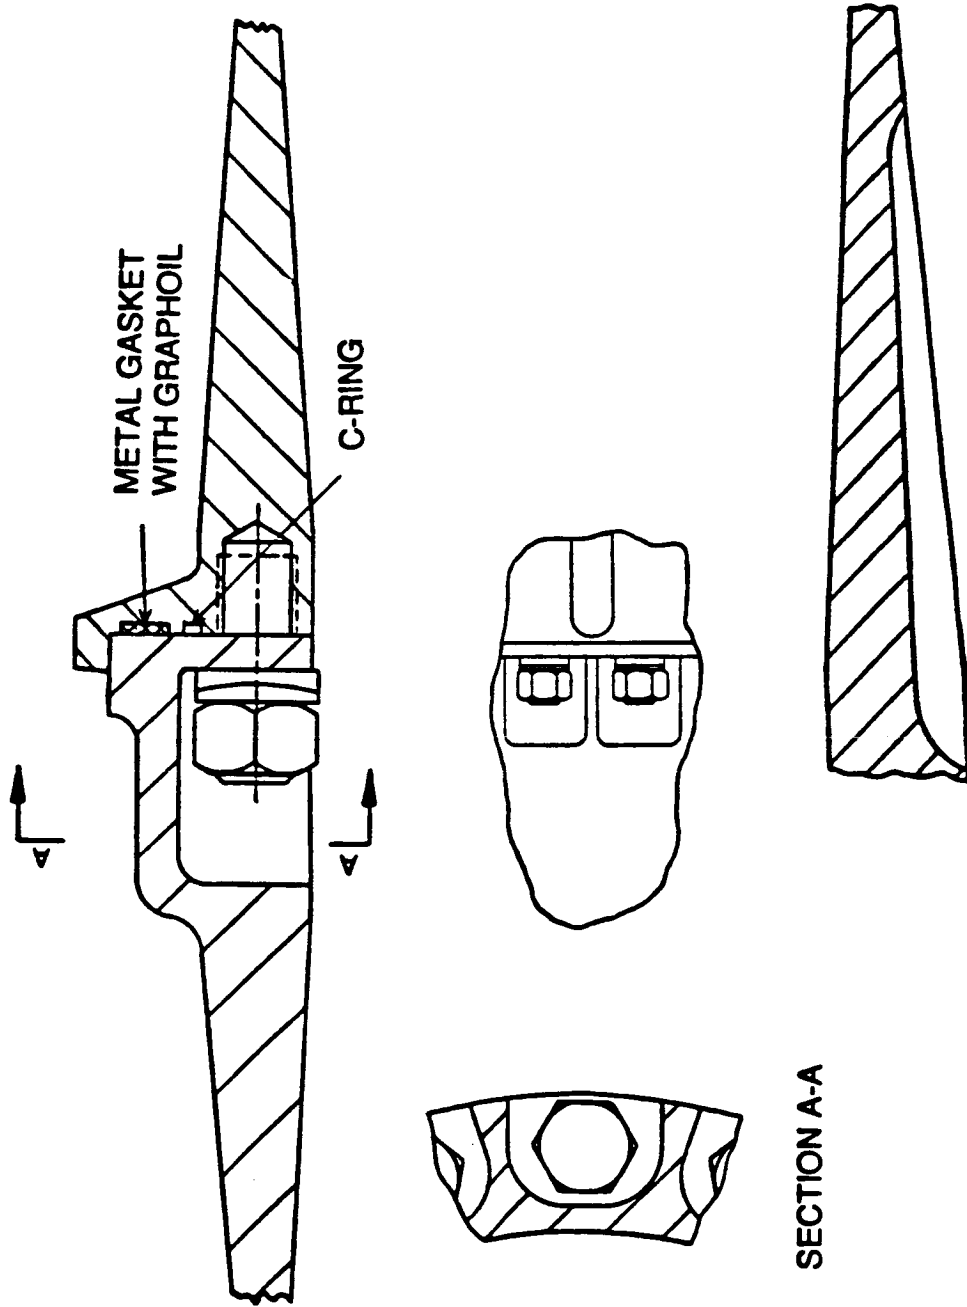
ARC AXIAL BOLTED JOINT.
